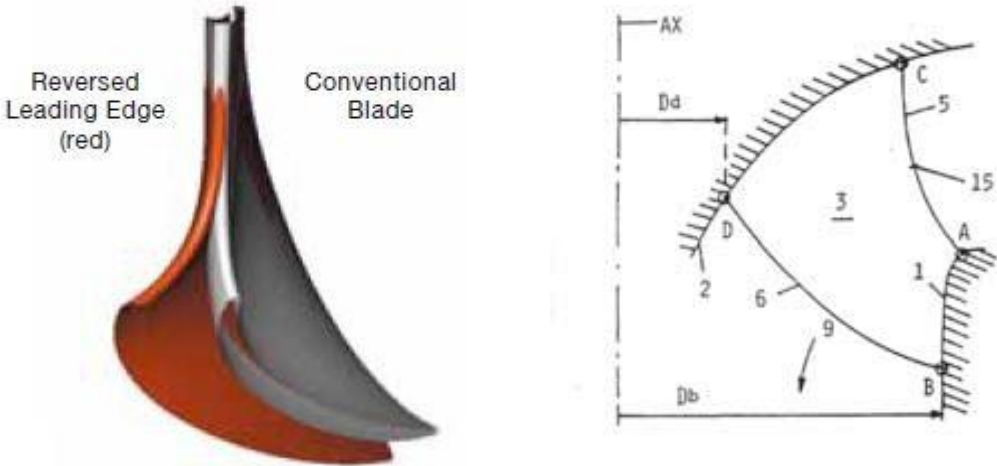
Reversed leading edge geometry (Left) – meridional view of X-Blade (Right), adapted from [68].
